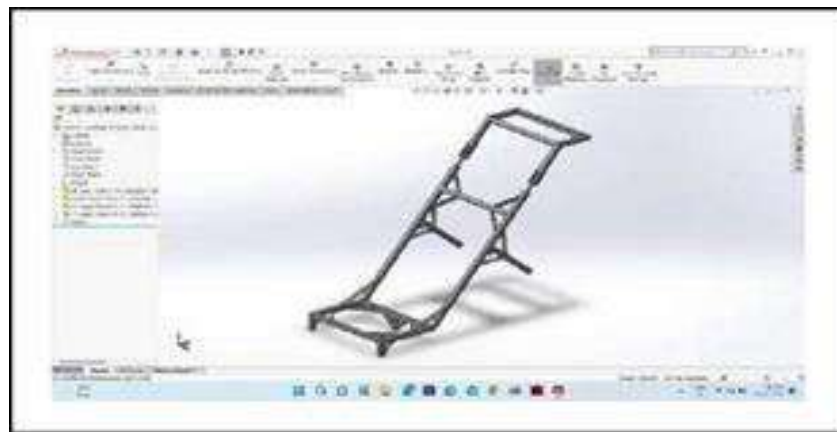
Assembly for Cultivator, Weeder, Furrower and Plainer
